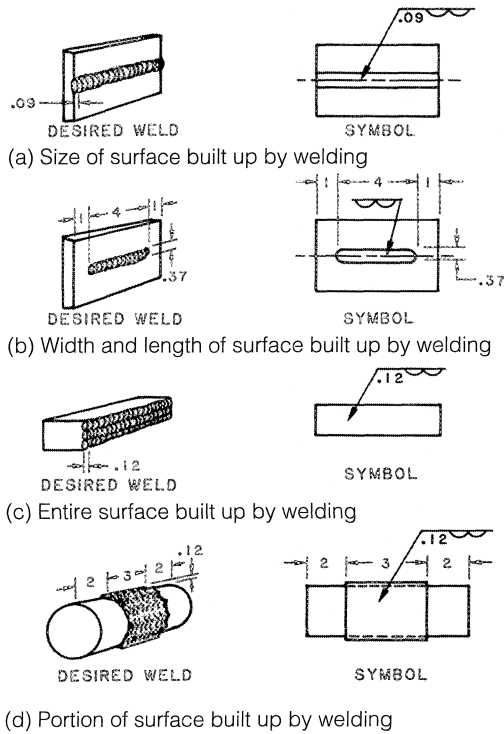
Dual Bead Weld Symbol to Indicate Surfaces Built Up by Welding
